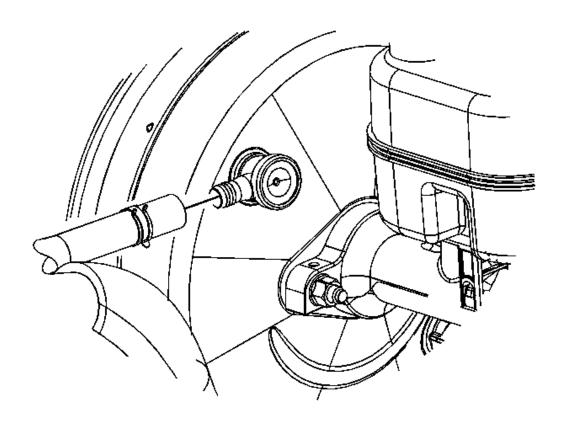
View Of Brake Booster Vacuum Hose & Booster Fitting Courtesy of GENERAL MOTORS CORP.
